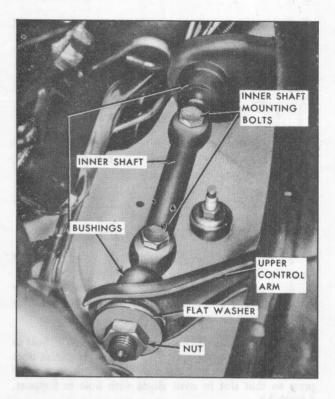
Upper Control Arm Shaft And Bushings Installed
